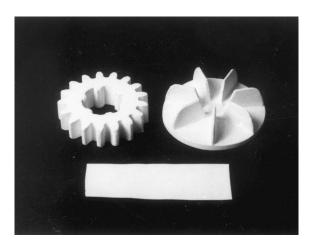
Photograph of gelcast alumina green bodies of a spur gear (d=41 mm, h=12 mm), a fan-blade assembly and a 0.2 mm thick tape.
